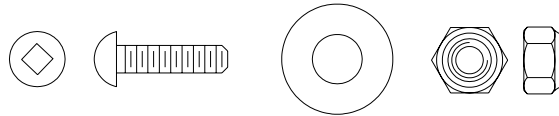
ROUND HEAD MACHINE SCREW $\phi 3/16"$ x $3/4"$ & LOCK NUT
